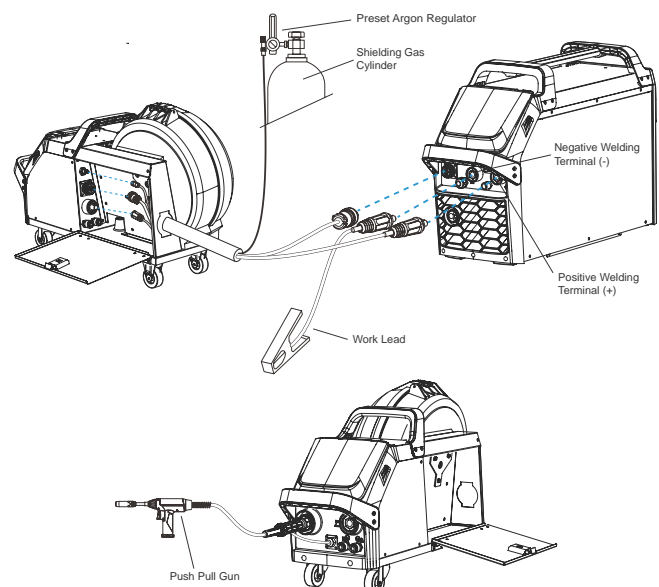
Setup with Push Pull Gun for Gas Shielded MIG Wire
